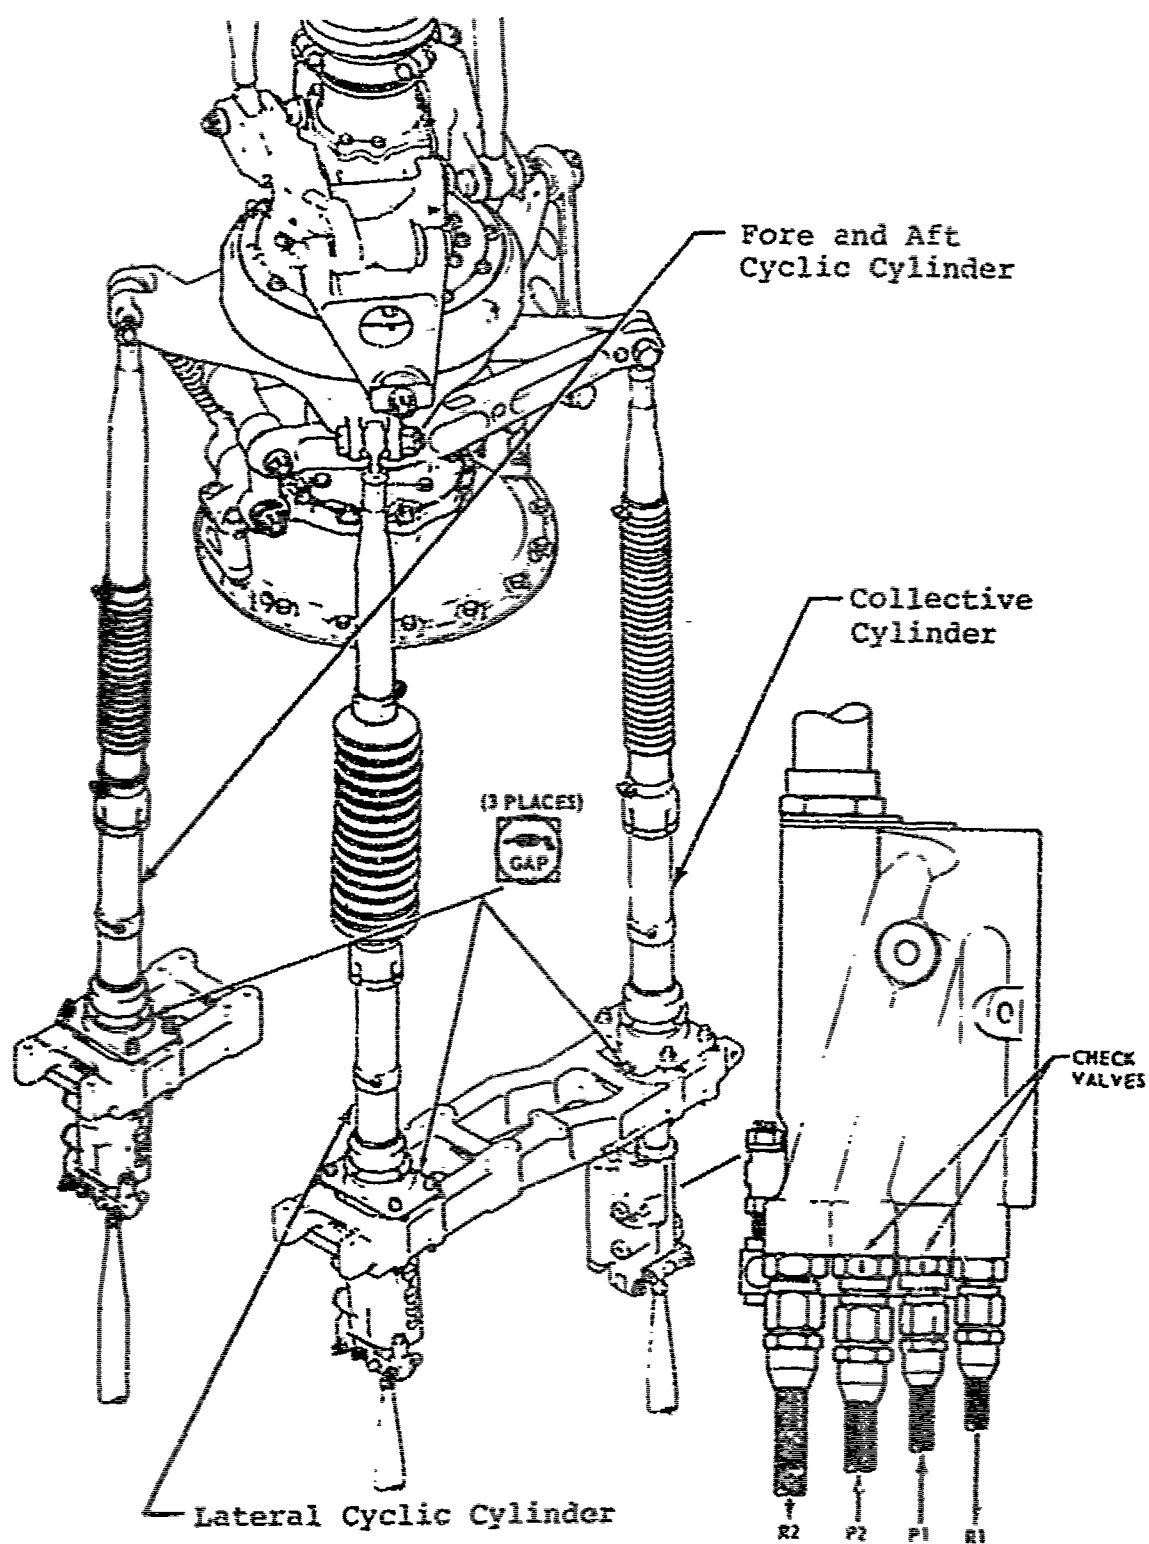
Flight Control Cylinder/Control Valve Installation, AE-1 Helicopter.
